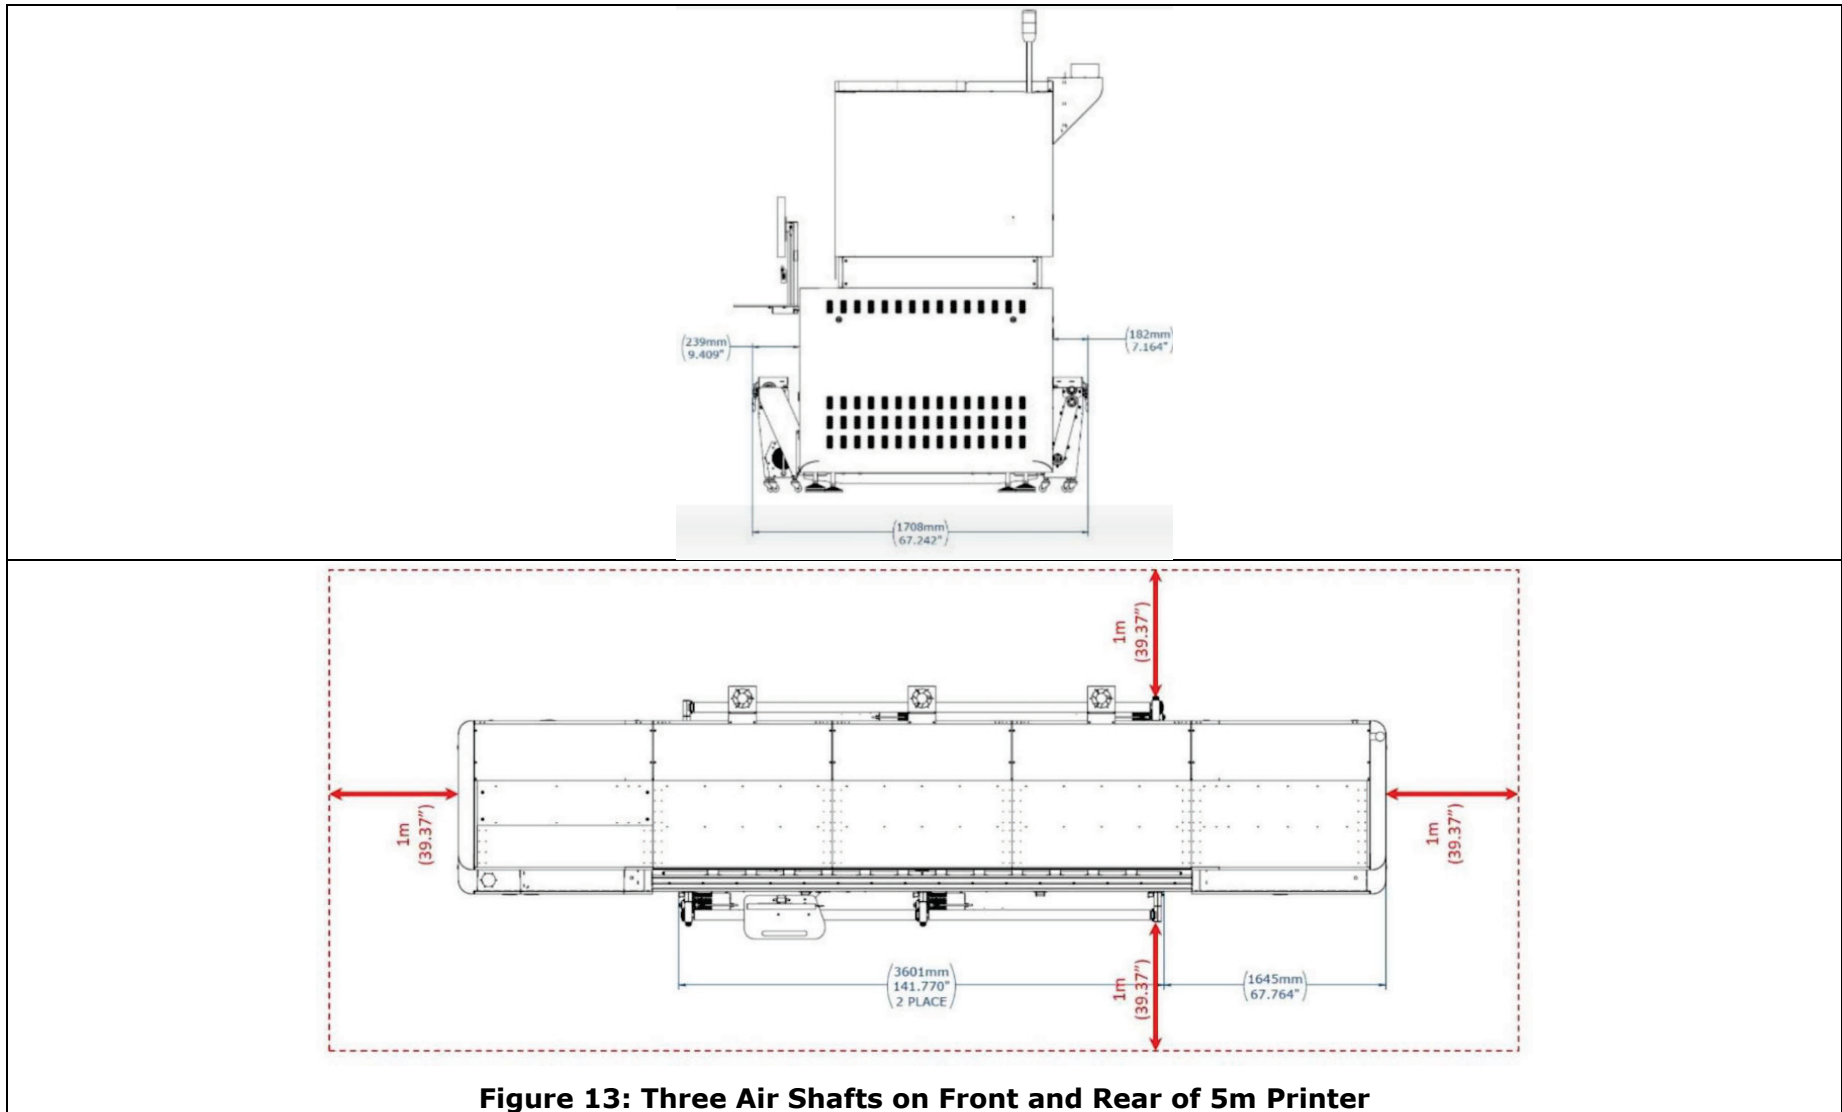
Three Air Shafts on Front and Rear of 5m Printer
